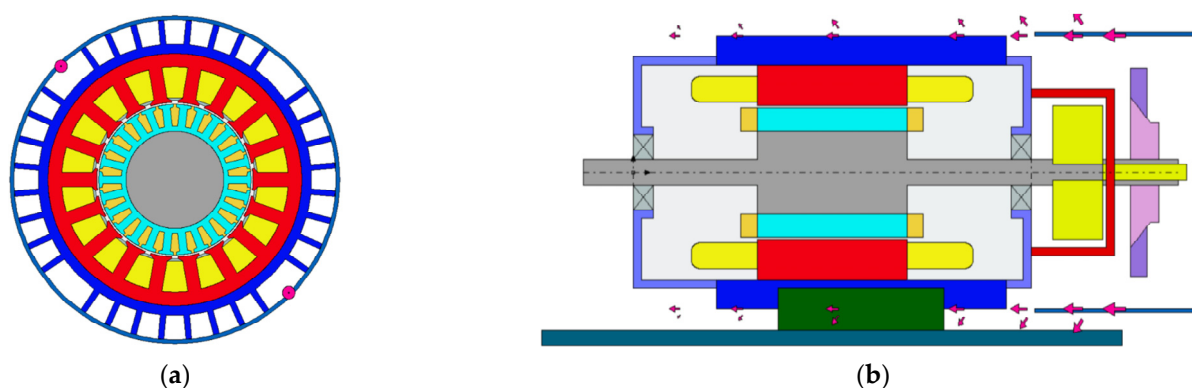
Radial view of fan-cooled motor mainly showcasing the housing type-axial fins (the windings, stator, and rotor) (a); axial view of fan-cooled motor depicting air flow coming from fan cooling system through the arrows (b).
